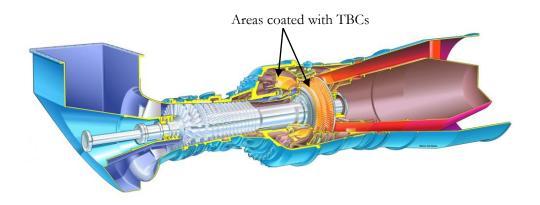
SGT-800 Industrial Gas Turbine, Courtesy of Siemens Industrial Turbomachinery.
